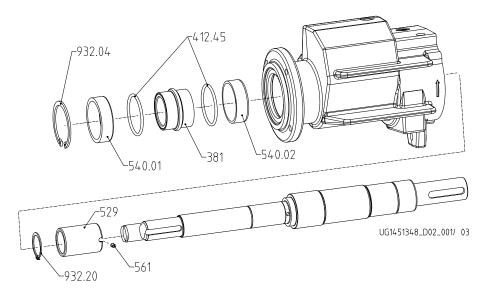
Exploded view of Etanorm SYT, bearing brackets WS\_25\_LS / WS\_55\_LS with SiC plain bearing
